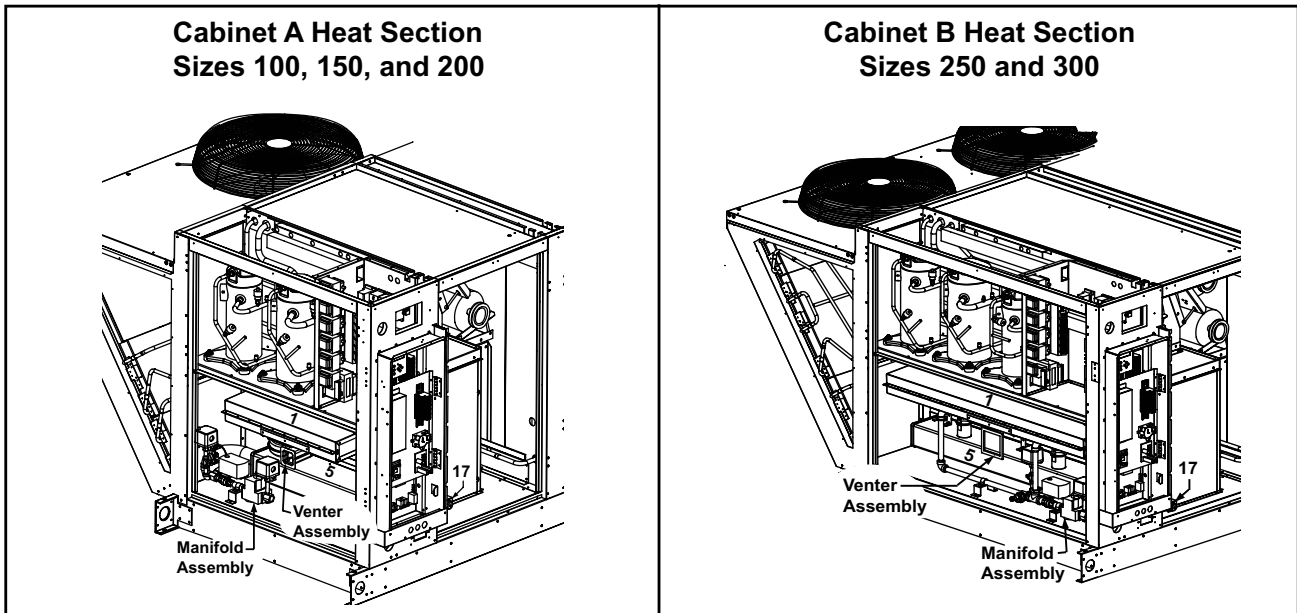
Cabinets A and B Gas Heat Sections (Refer to [Table 41](#))
